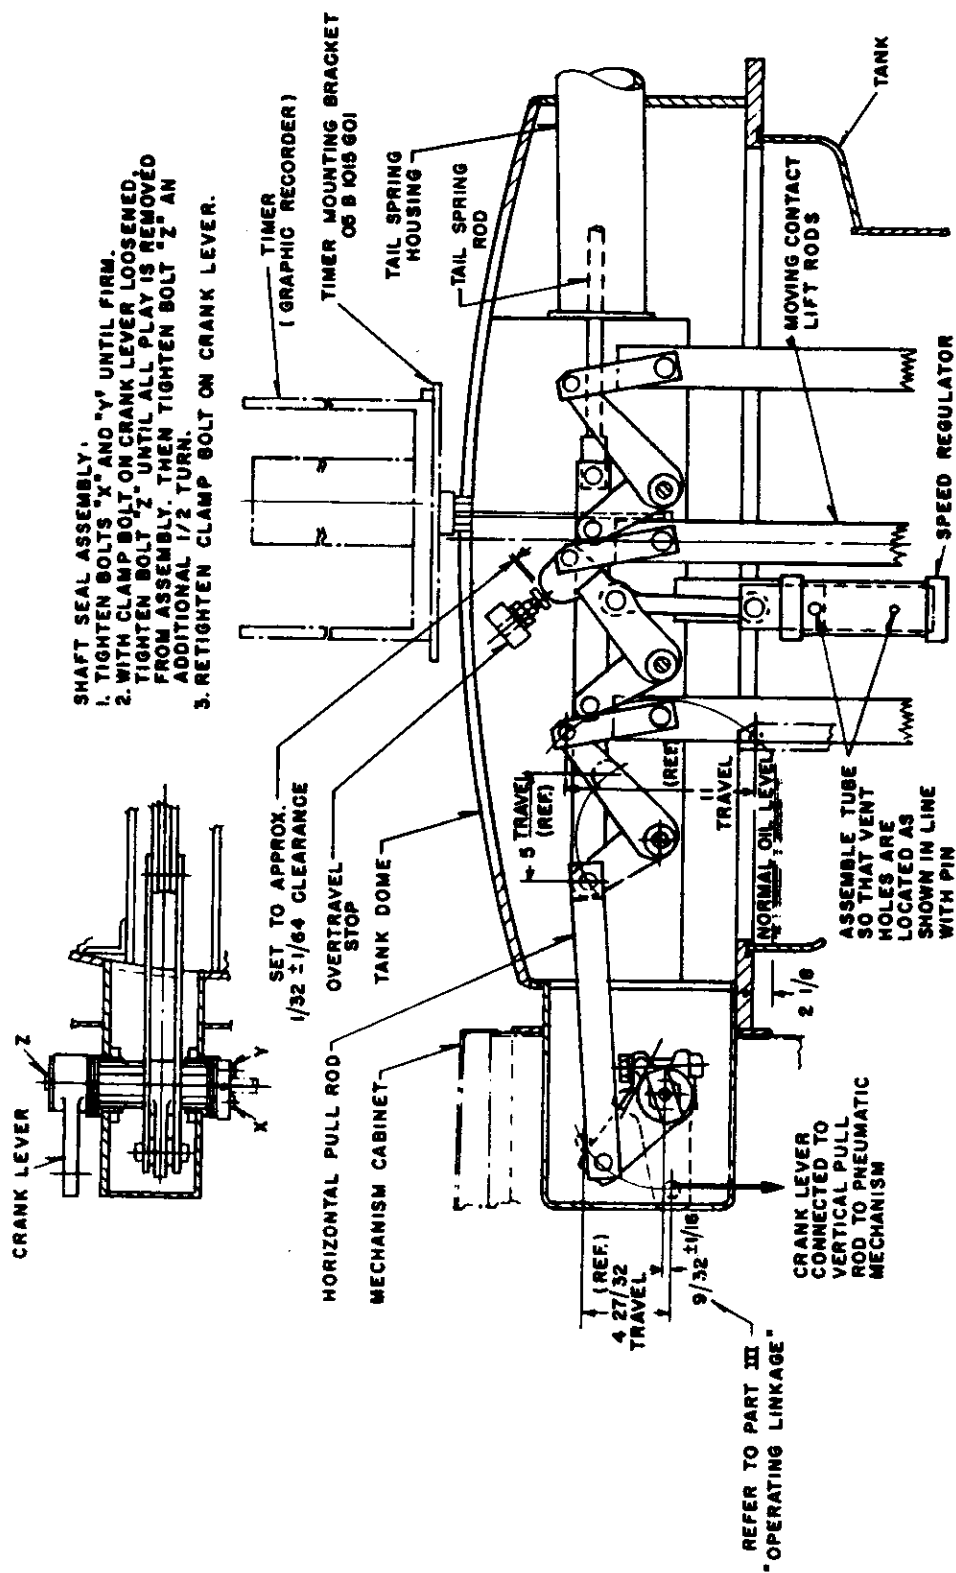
Pole Unit Linkage and Bell Crank Assembly and Graphic Recorder Mounting
